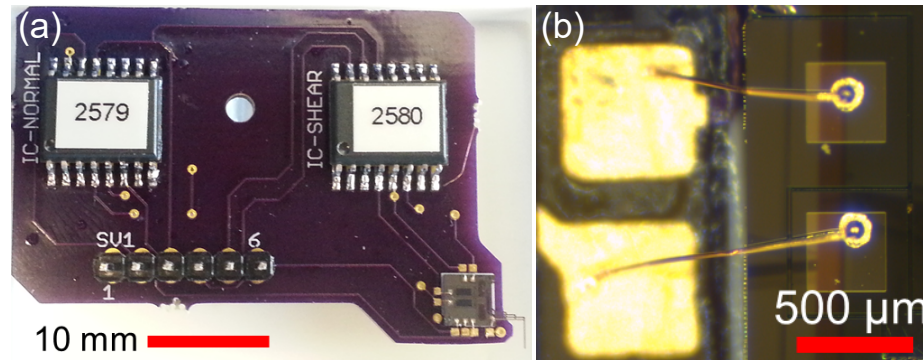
Assembled comb-drive sensor with PCB: (a) Capacitive microcantilever on PCB and (b) Wire bondings
